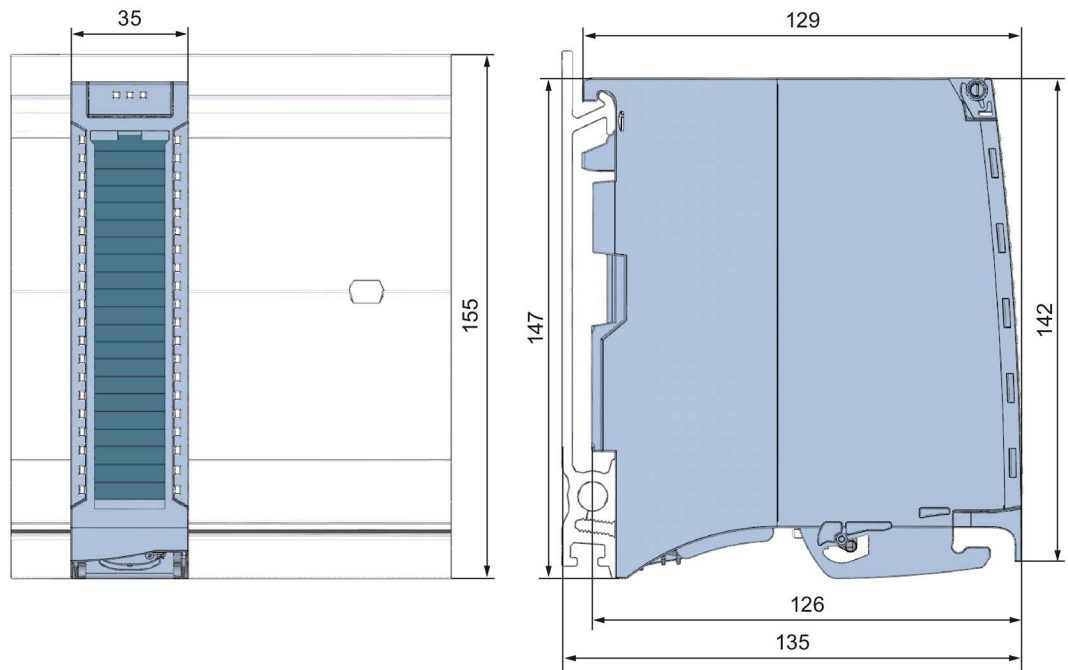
Dimension drawing of the DQ 16x230VAC/1A ST module
